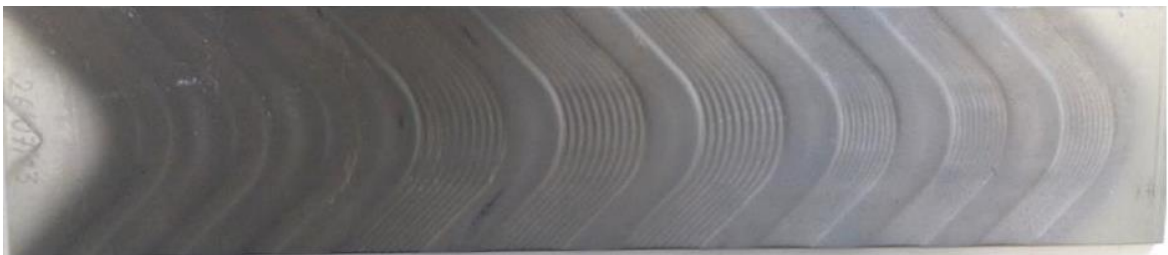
Constant radius of Ti6Al4V specimen machined [40]
